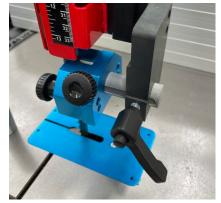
Test Fit of Thrust Bearing 1 Prototype
